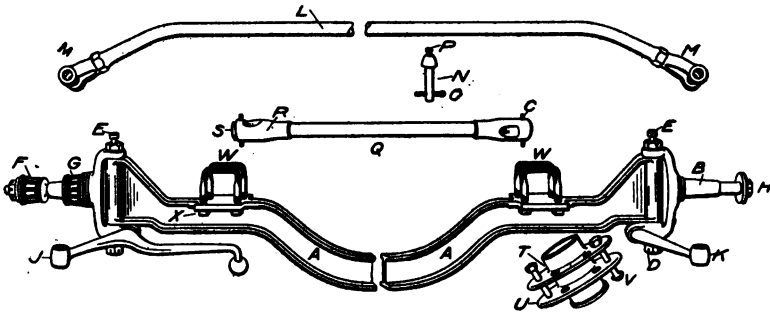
I-Beam Type of Front Axle, with Parts Making Up Front-Axle System, as Used in Frayer-Miller Cars.
